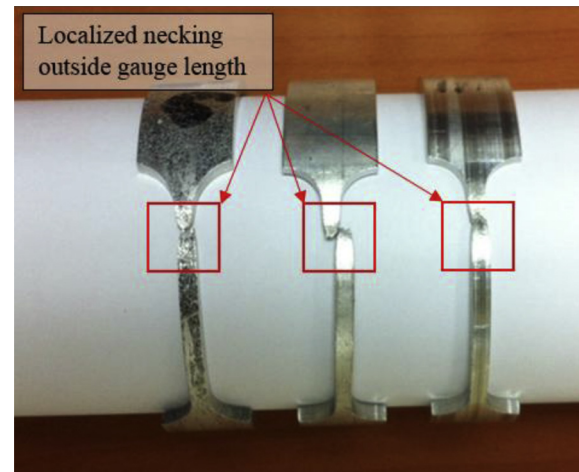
Failed ring specimens using RHTT (Ring Hoop Tension Test) test method outlined in Ref. [10].
